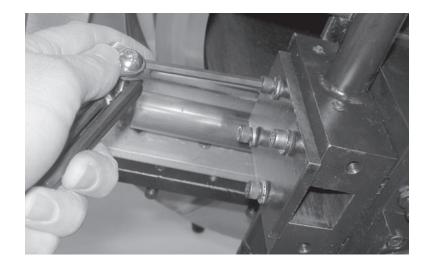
Loosen the screws on the tool holder plate to allow the tool holder to fit into the slide.
